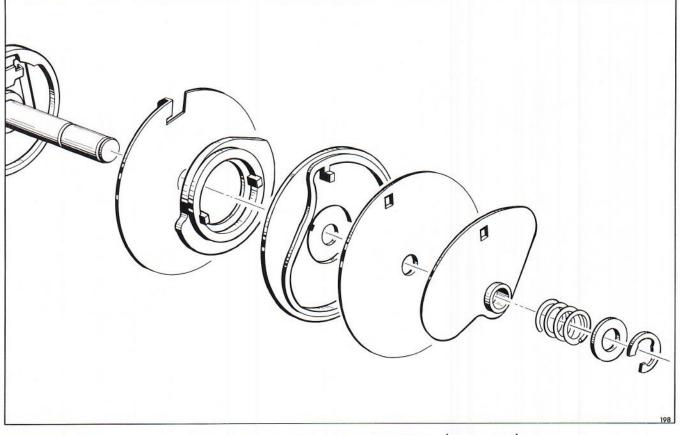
CAM STACK ASSEMBLY (CAM SIDE)
